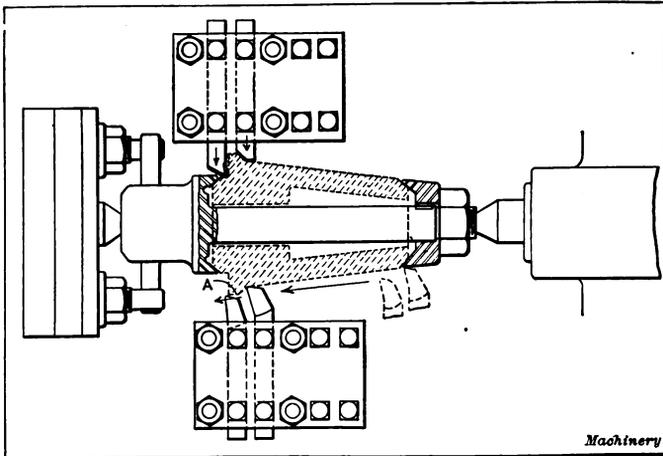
Method of holding Tapered Bushings shown in Fig. 7
